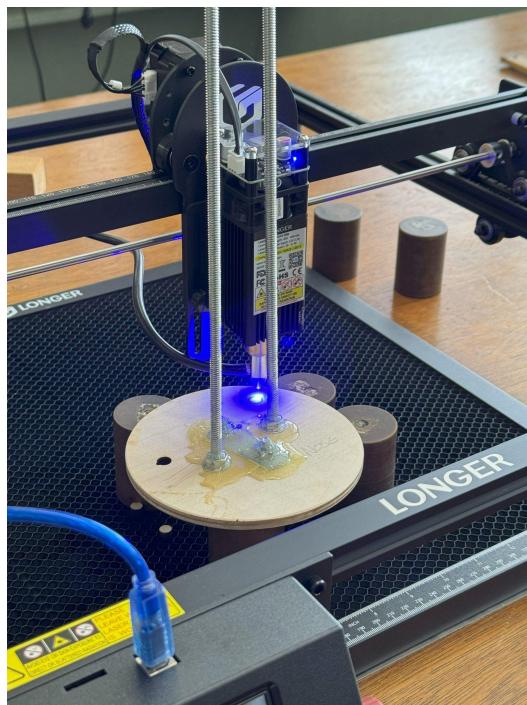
The laser cutter we used to cut holes in the bulkhead. This is the bulkhead closer to the nose cone. The rods of the avionics bay are also shown in this photo
